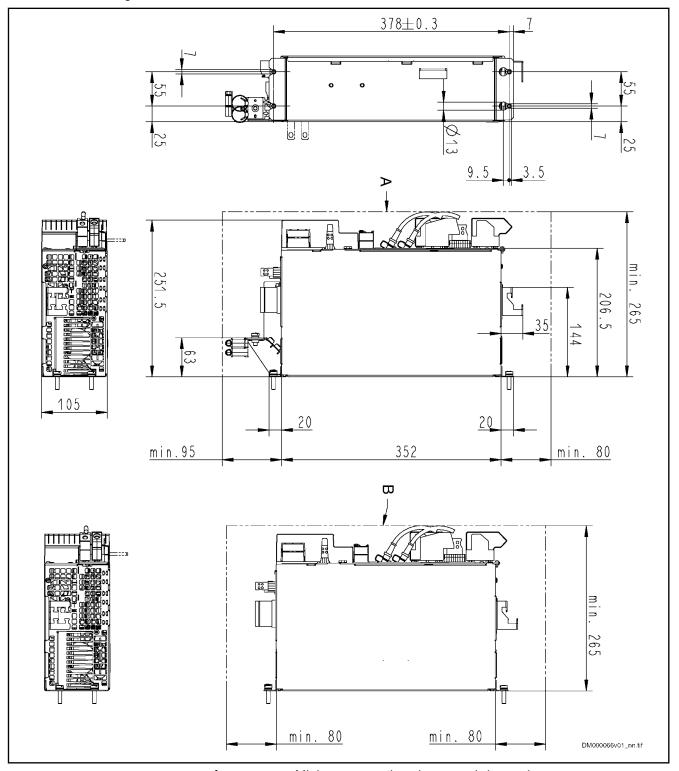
Dimensional drawing HCS02.1E-W0012
